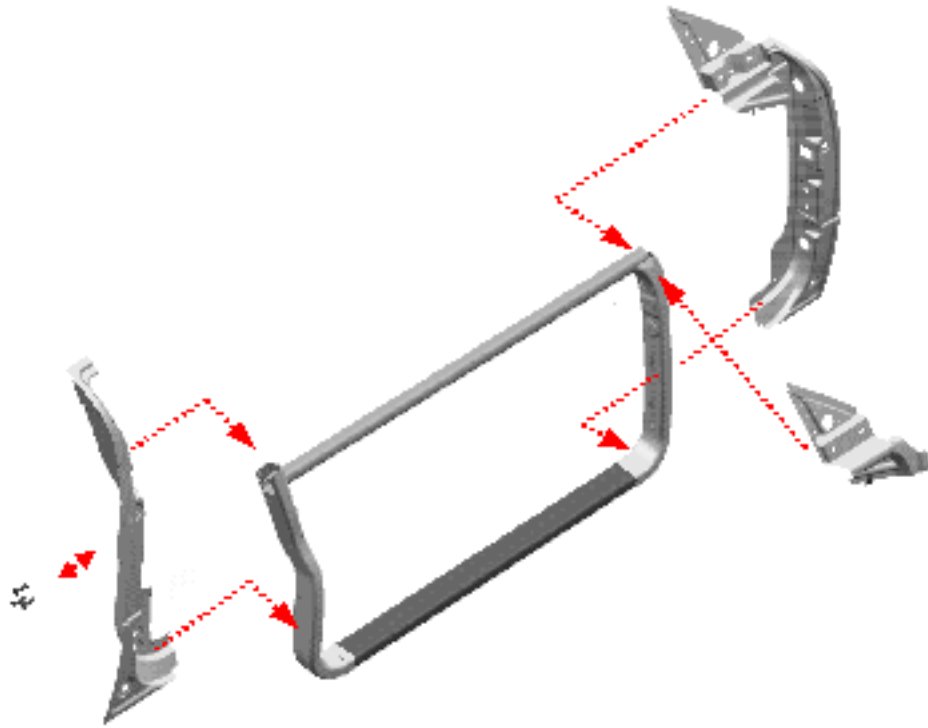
Subassembly #2 (CATIA): Front Door Inner Parts to Front Door Frame
